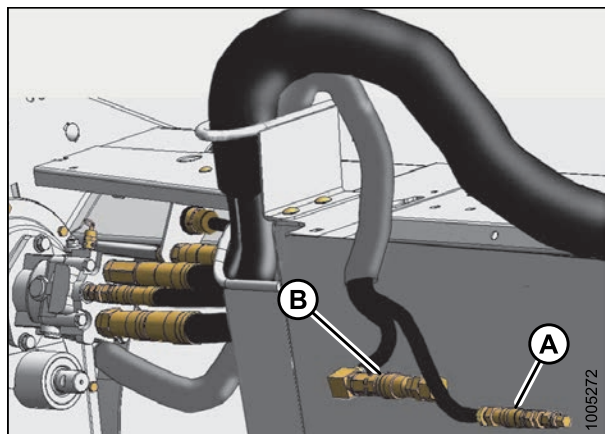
Auger Pressure and Auger/Reel Return Hose Couplers – 14-Ft. and 16-Ft. Header Shown (18-Ft. Similar)
